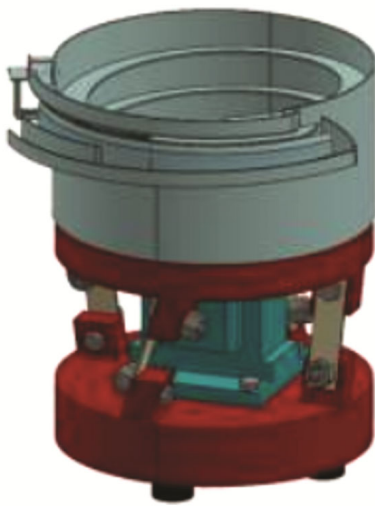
3D Assembly of Vibratory Bowl Feeder
